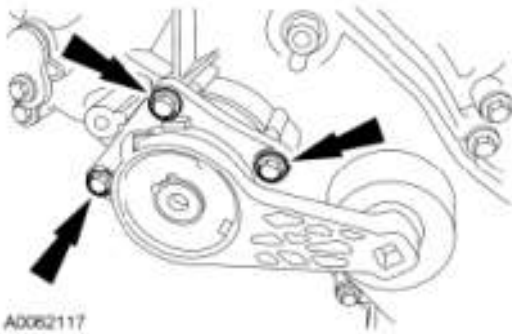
Locating Accessory Drive Belt Tensioner Bolts
